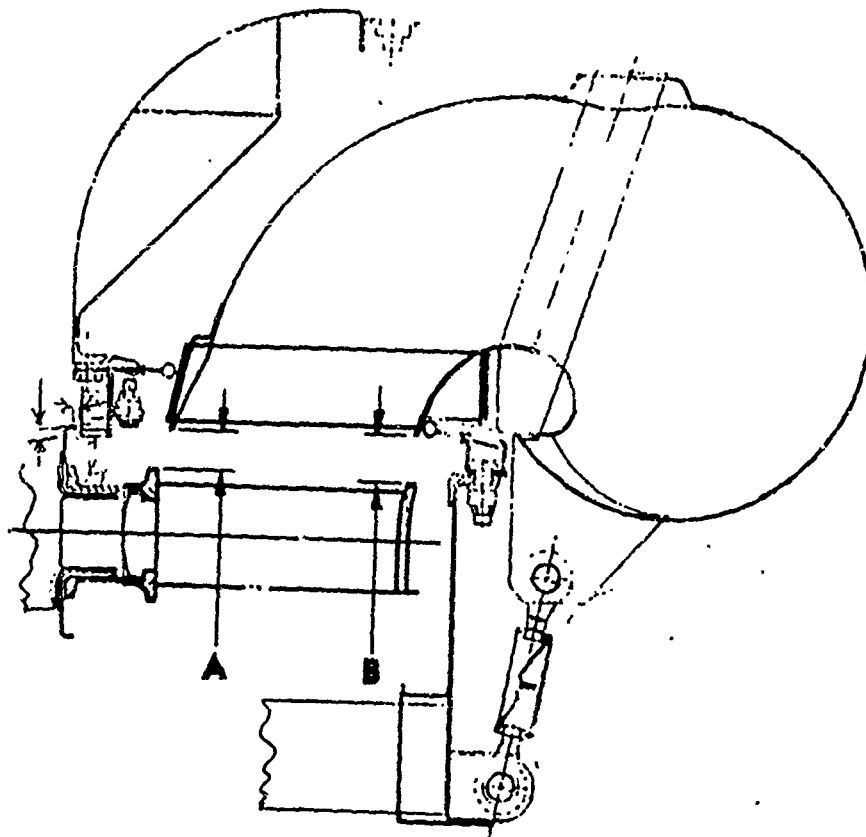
Assembly of Bearing Retaining Nut Tabwasher
